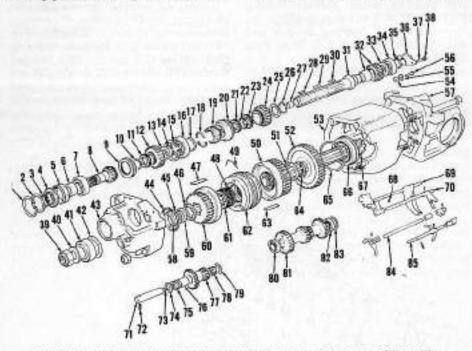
Exploded view of 12 speed synchromesh transmission used on 1690 models.
